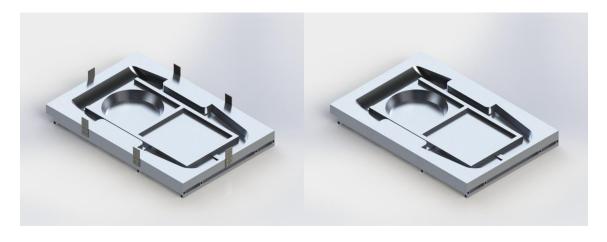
Aligned mold base on frame (left) and weld-ready mold base (right)
